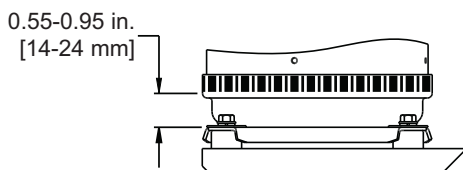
Copeland ZP/ZPD103, 120, 137 Crankcase Heater Location
